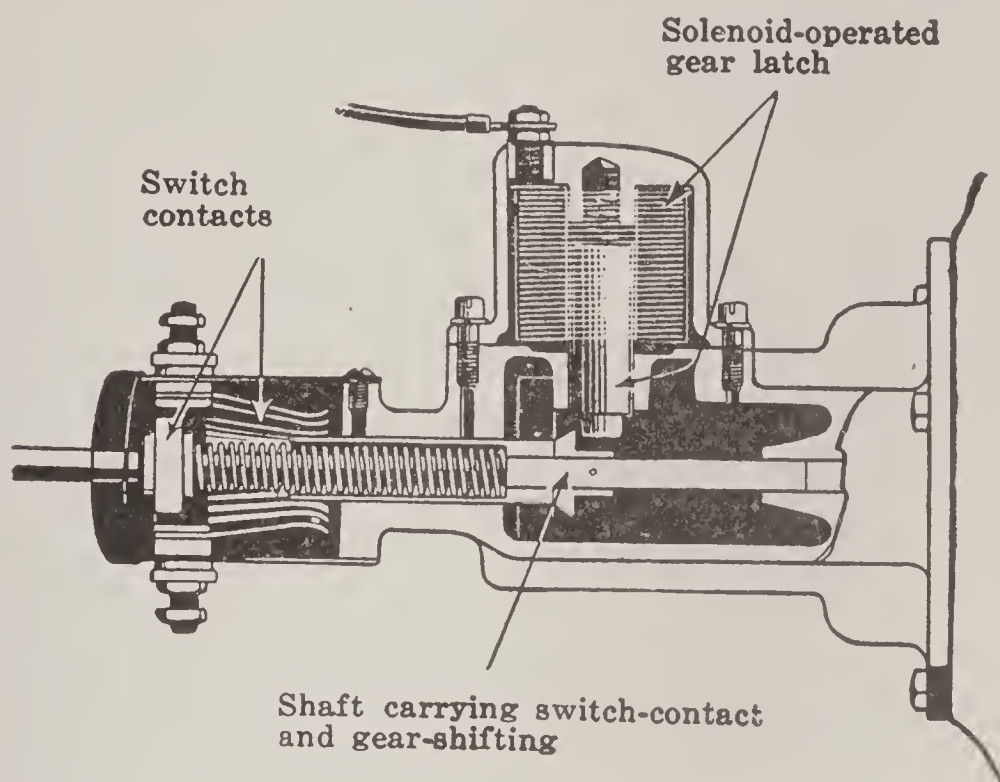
Sectional View of Auto-Lite Starting Switch and Gear Release
